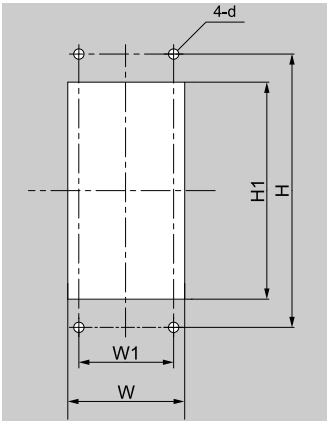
Panel Cut-Out Dimensions to Attach Inside Control Panel
